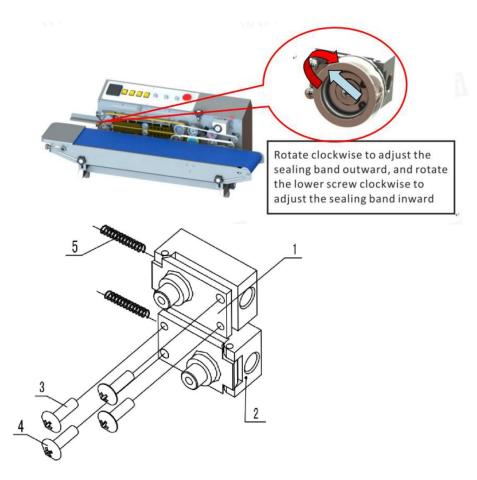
(1) Driven Wheel Seat (Adjusting Block), (2) Driven Wheel Seat (Adjusting Block), (3)/(4) Adjusting Screws, (5) Springs
